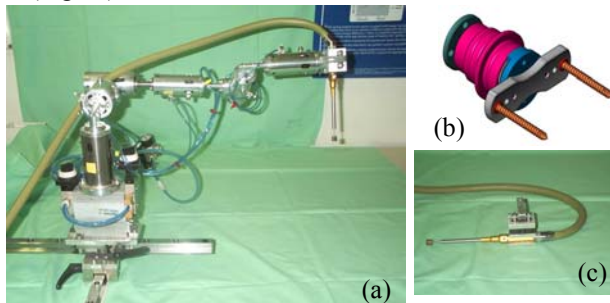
a) I-arm prototype b) Cad model of rapid hooking-release; c) The fixing system of cutting tool system
